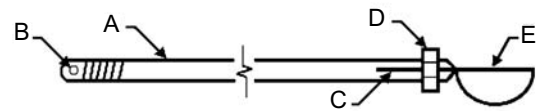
An outline of our sampling tool with the components labeled. A — the threaded steel rod; B — key ring hold; C — five centimeter long slot; D — hex nut; E — sharpened measuring spoon.
